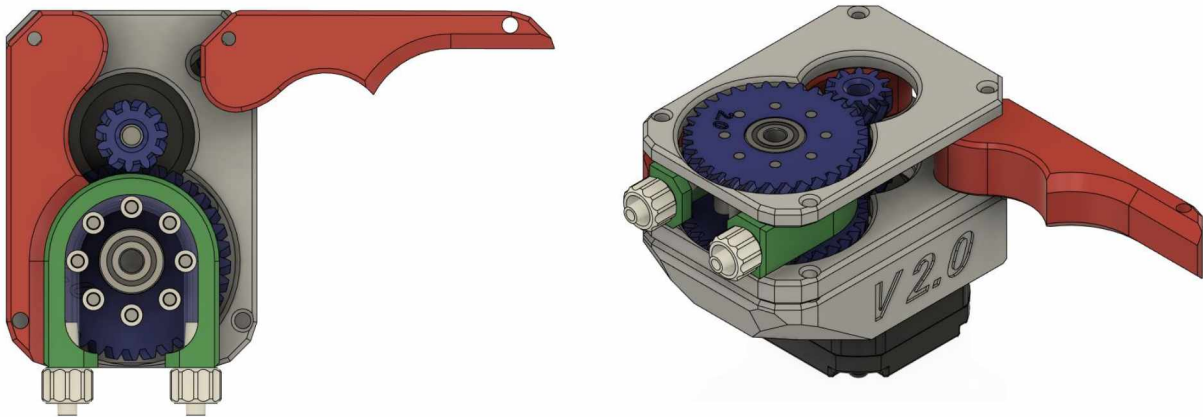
Top view of pump mechanism showing wings (A), cartridge (B), gear mechanism (C), and rollers (D).
